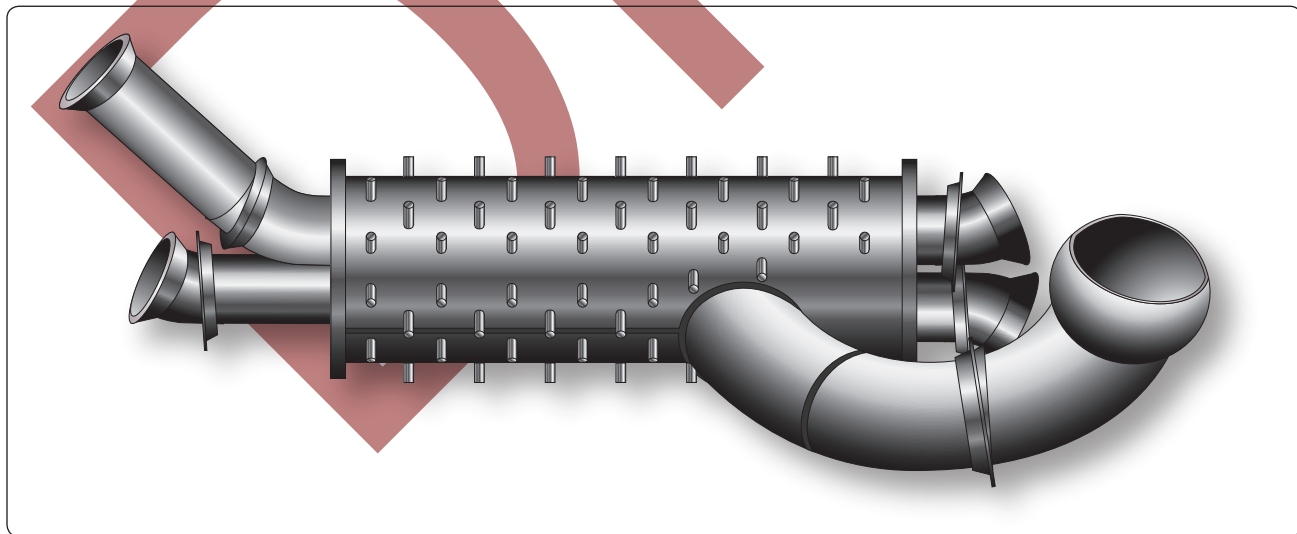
An exhaust manifold with its shroud removed showing numerous welded studs used to increase heat transfer from the exhaust to the ambient air going to the cabin.
